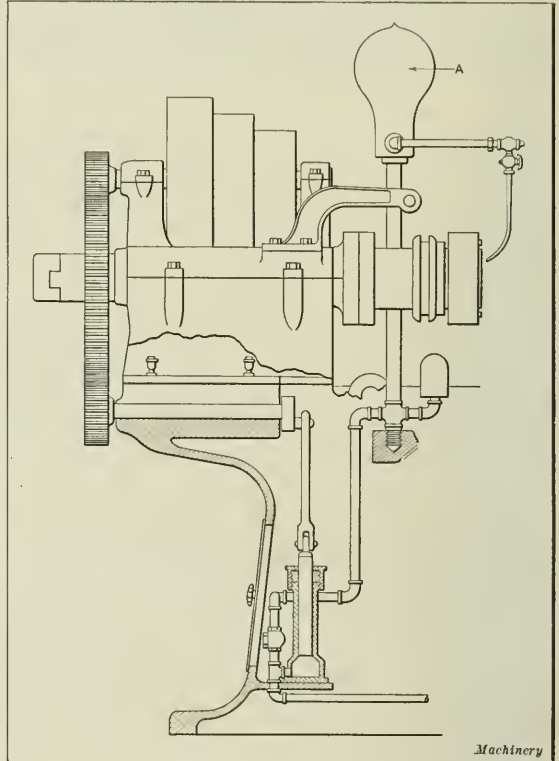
Use of Plunger Pump on Bolt Threader made by National Machinery Co.
